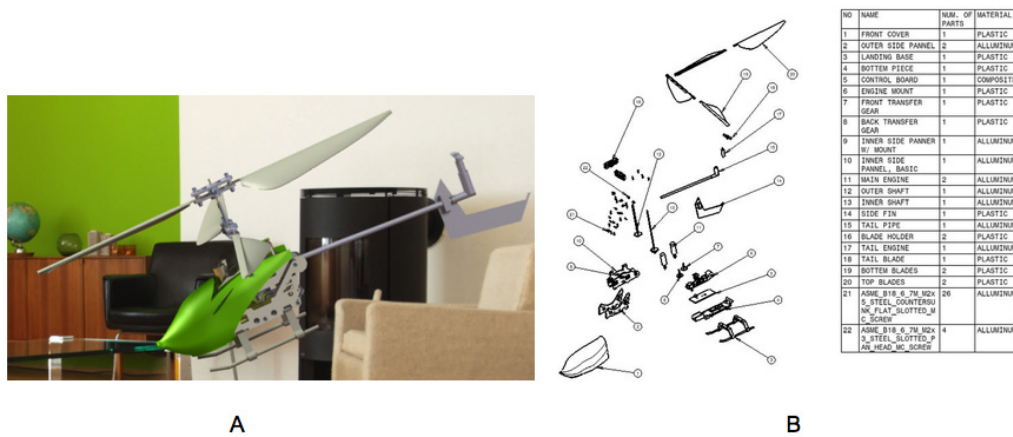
A: Rendered RC-helicopter with USB port and charging indicator, B: Exploded view of RC-helicopter from 2014.
